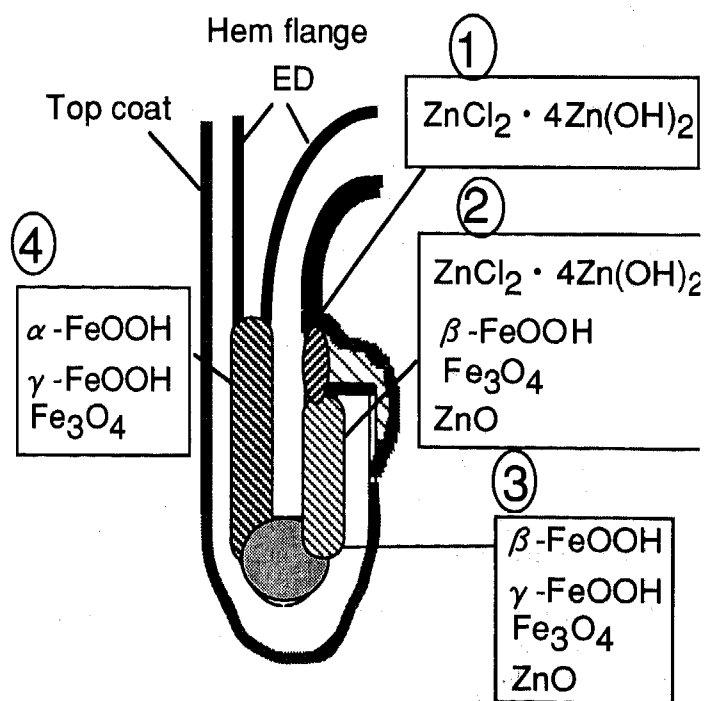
Schematic of corrosion products in door hem flange of Zn-Ni alloy coated steel after field test for 8 years
